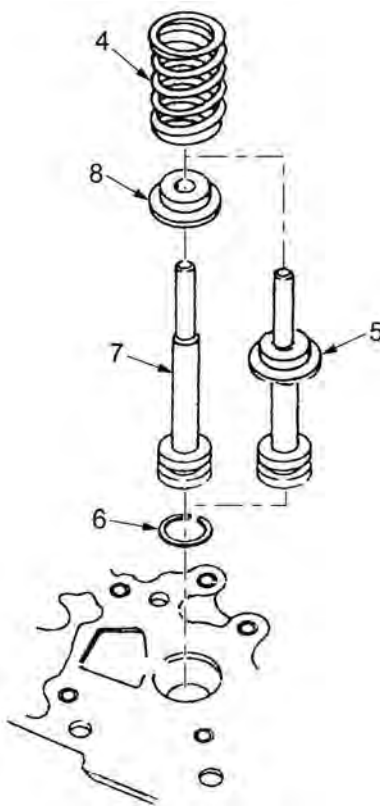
Two-Piece or One-Piece Brake Coolant Valve Removal.
